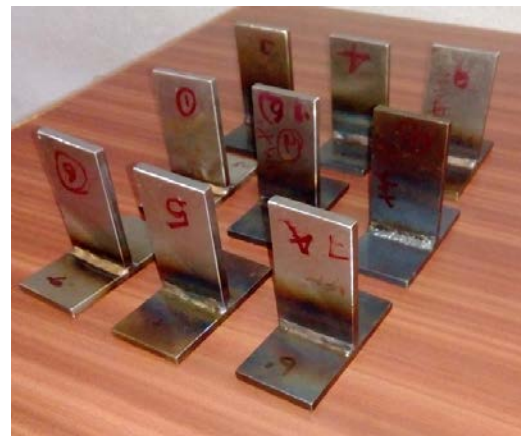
Nine types of weld T- joint welds by TIG welding process
